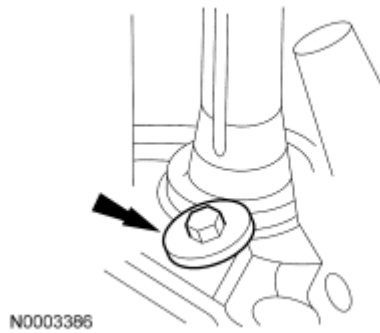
Locating Camshaft Synchronizer Retaining Bolt
